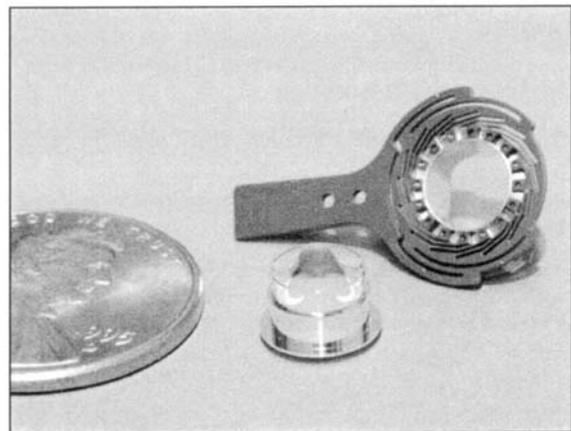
Two components of the thermo-mechanical package; a silicon equalizer glued to the TMP can and a TMP can before assembly.
